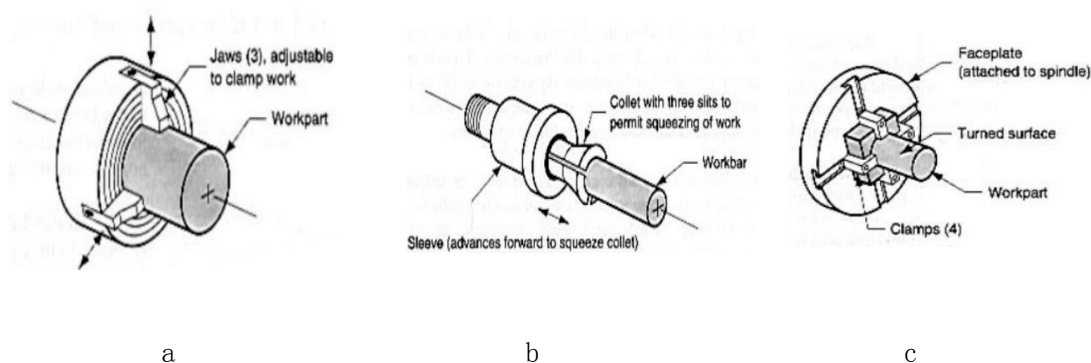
Working piece holding types on lathe machine; (a) Three Jaws Chuck; (b)
